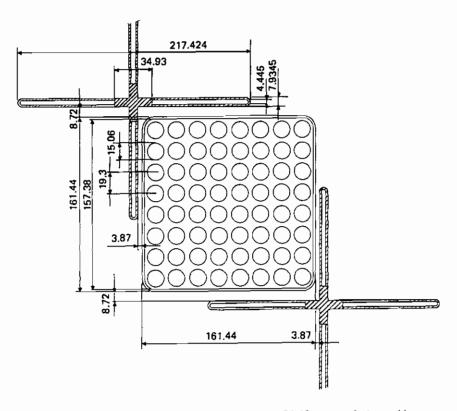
Horizontal cross-section of the Garigliano reactor SA-13 recharge fuel assembly (All dimensions are given in mm)
